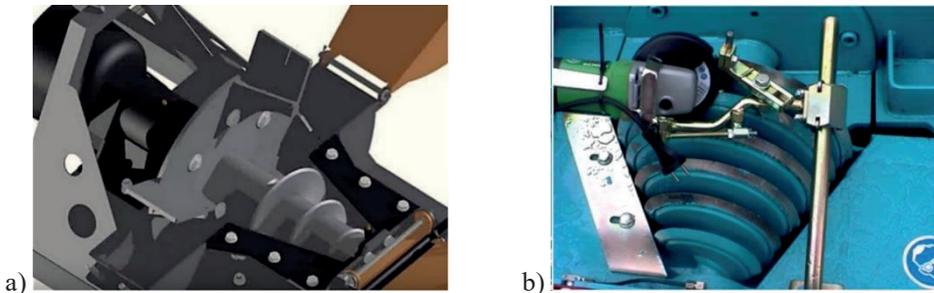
Diagram of the working tool of screw chipper (a) (Čabalová et al., 2021; Krilek and Kováč, 2013), auger of chipper aggregated with agricultural tractor (b) (Photo: P. Tylek)
